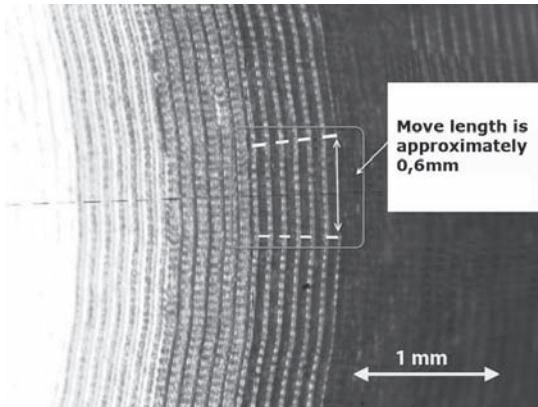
Part after toolpath 3 (enlarged 30-times)
